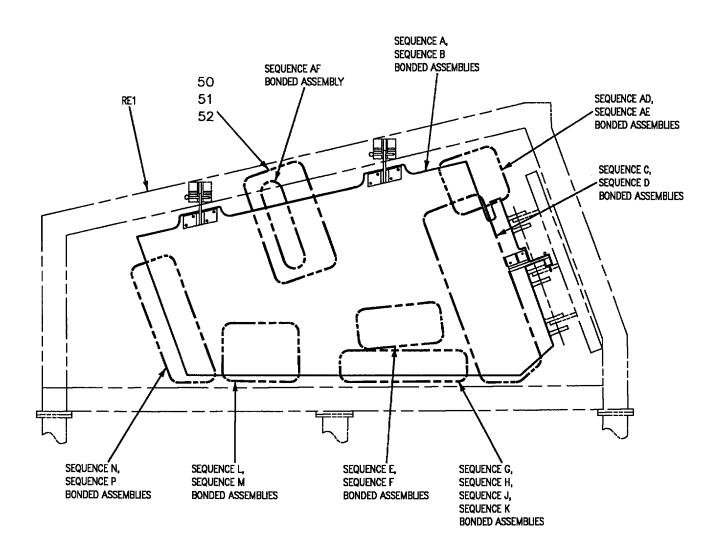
Installation of Drill Plates into Maintenance Fixture (Sheet 4)
